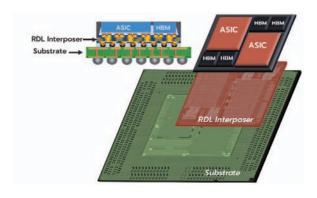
Chip-to-package IDE design for chiplet integration with 2 ASICs and 4 HBMs on FOCoS RDL package
